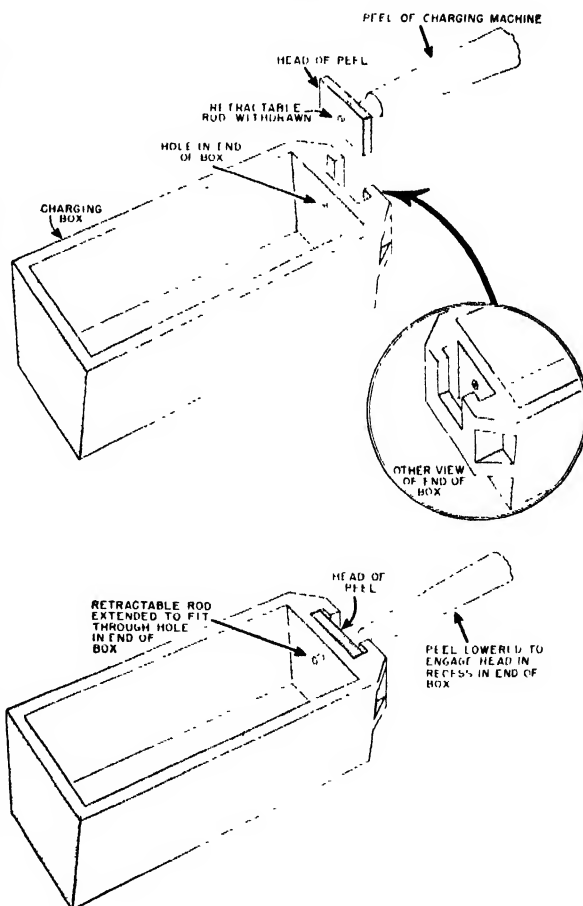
Sketch showing one method by which the head of a charging machine peel is temporarily locked onto the end of a charging box to permit the box to be turned upside down for dumping its contents onto the bottom of an open-hearth furnace.
